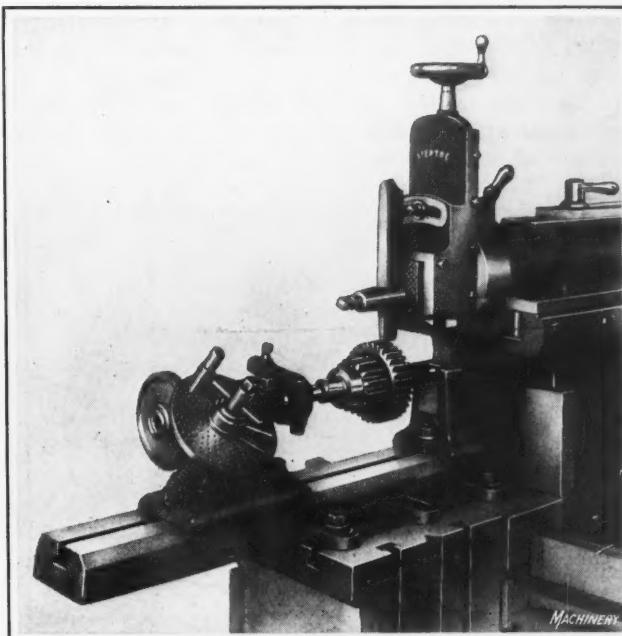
Use of Index-centers and a Formed Tool for performing Gear Tooth Planing Operations on the Shaper
